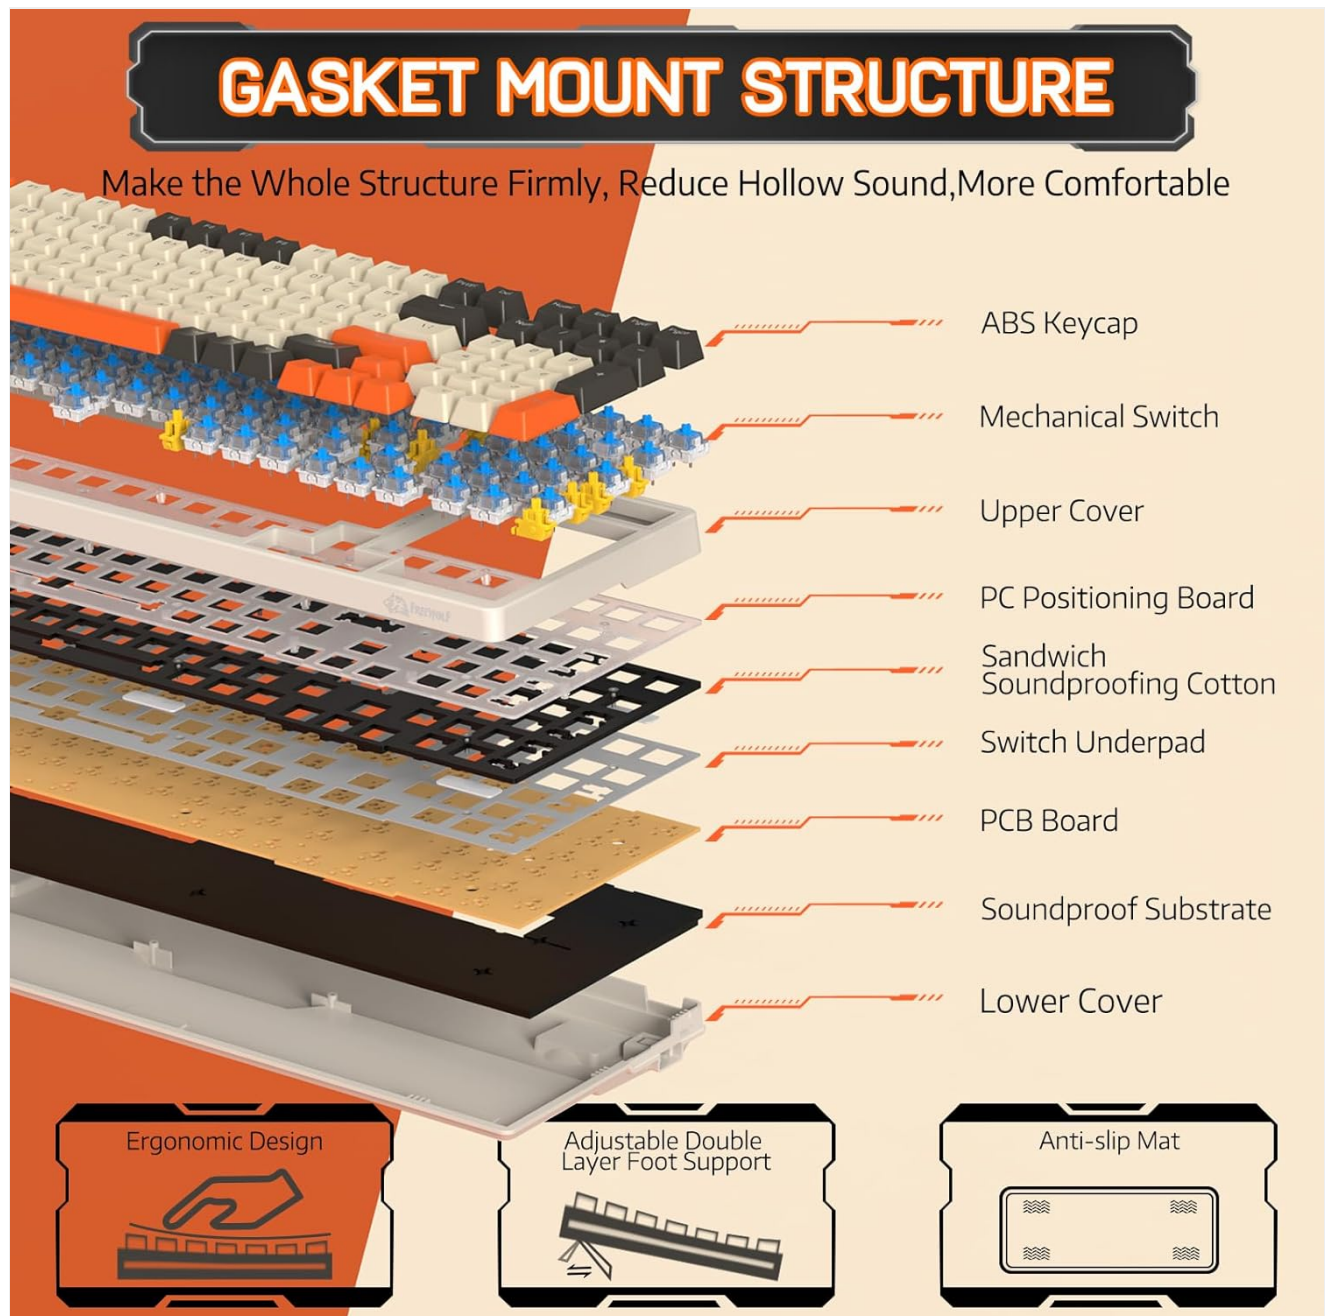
An exploded diagram illustrating the internal gasket mount structure of the keyboard, showing layers of soundproofing cotton and the PCB for enhanced typing feel.
